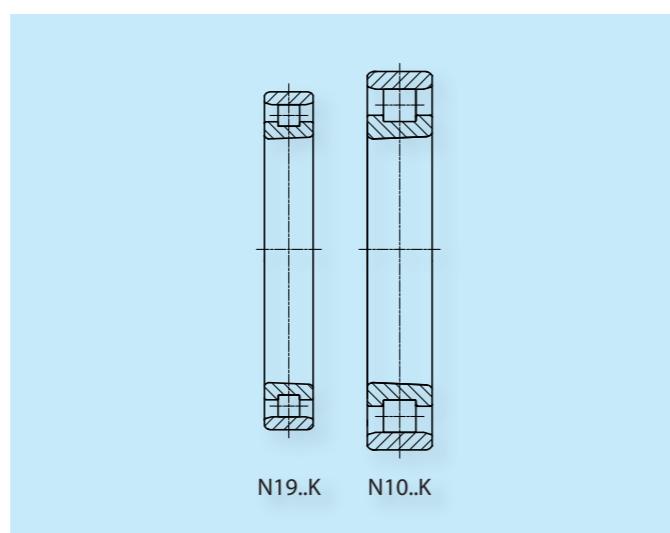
series of single-row high-precision cylindrical roller bearing
